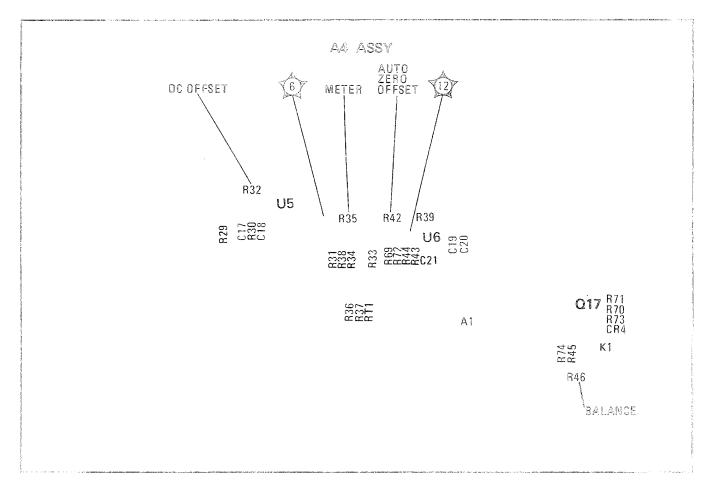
P/O A4 Assembly (DC Ampl/Auto Tero) Coroponent and Test Point Locations
